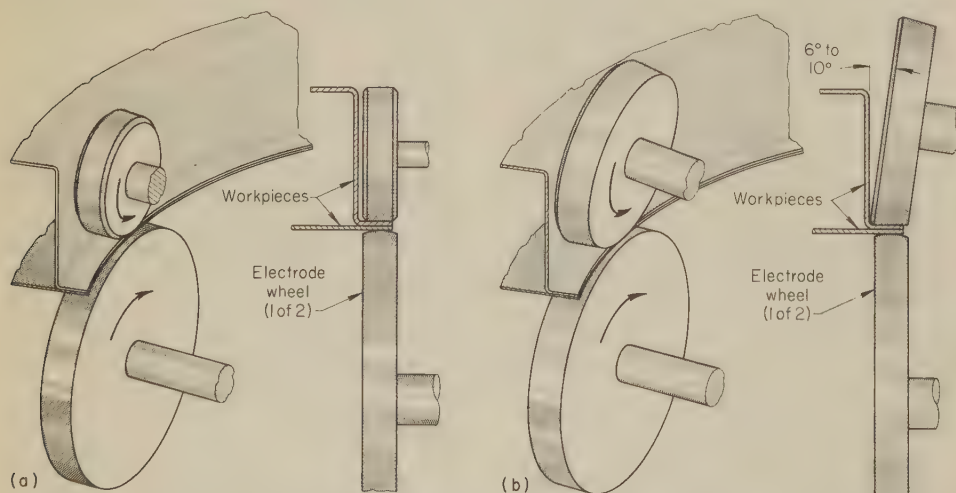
Use of a small-diameter upper electrode wheel (a) or of a canted larger-diameter upper electrode wheel (b) to avoid interference with a sidewall in welding a narrow flange along an inside radius
